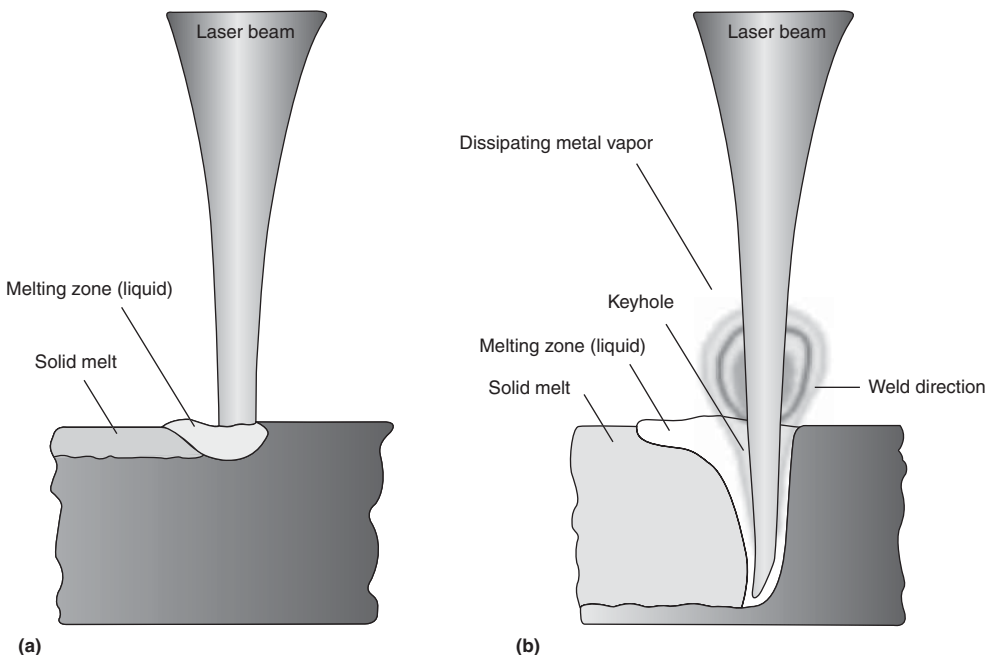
Laser welding processes. (a) Conduction-limited laser welding. (b) Penetration (keyhole) laser welding
